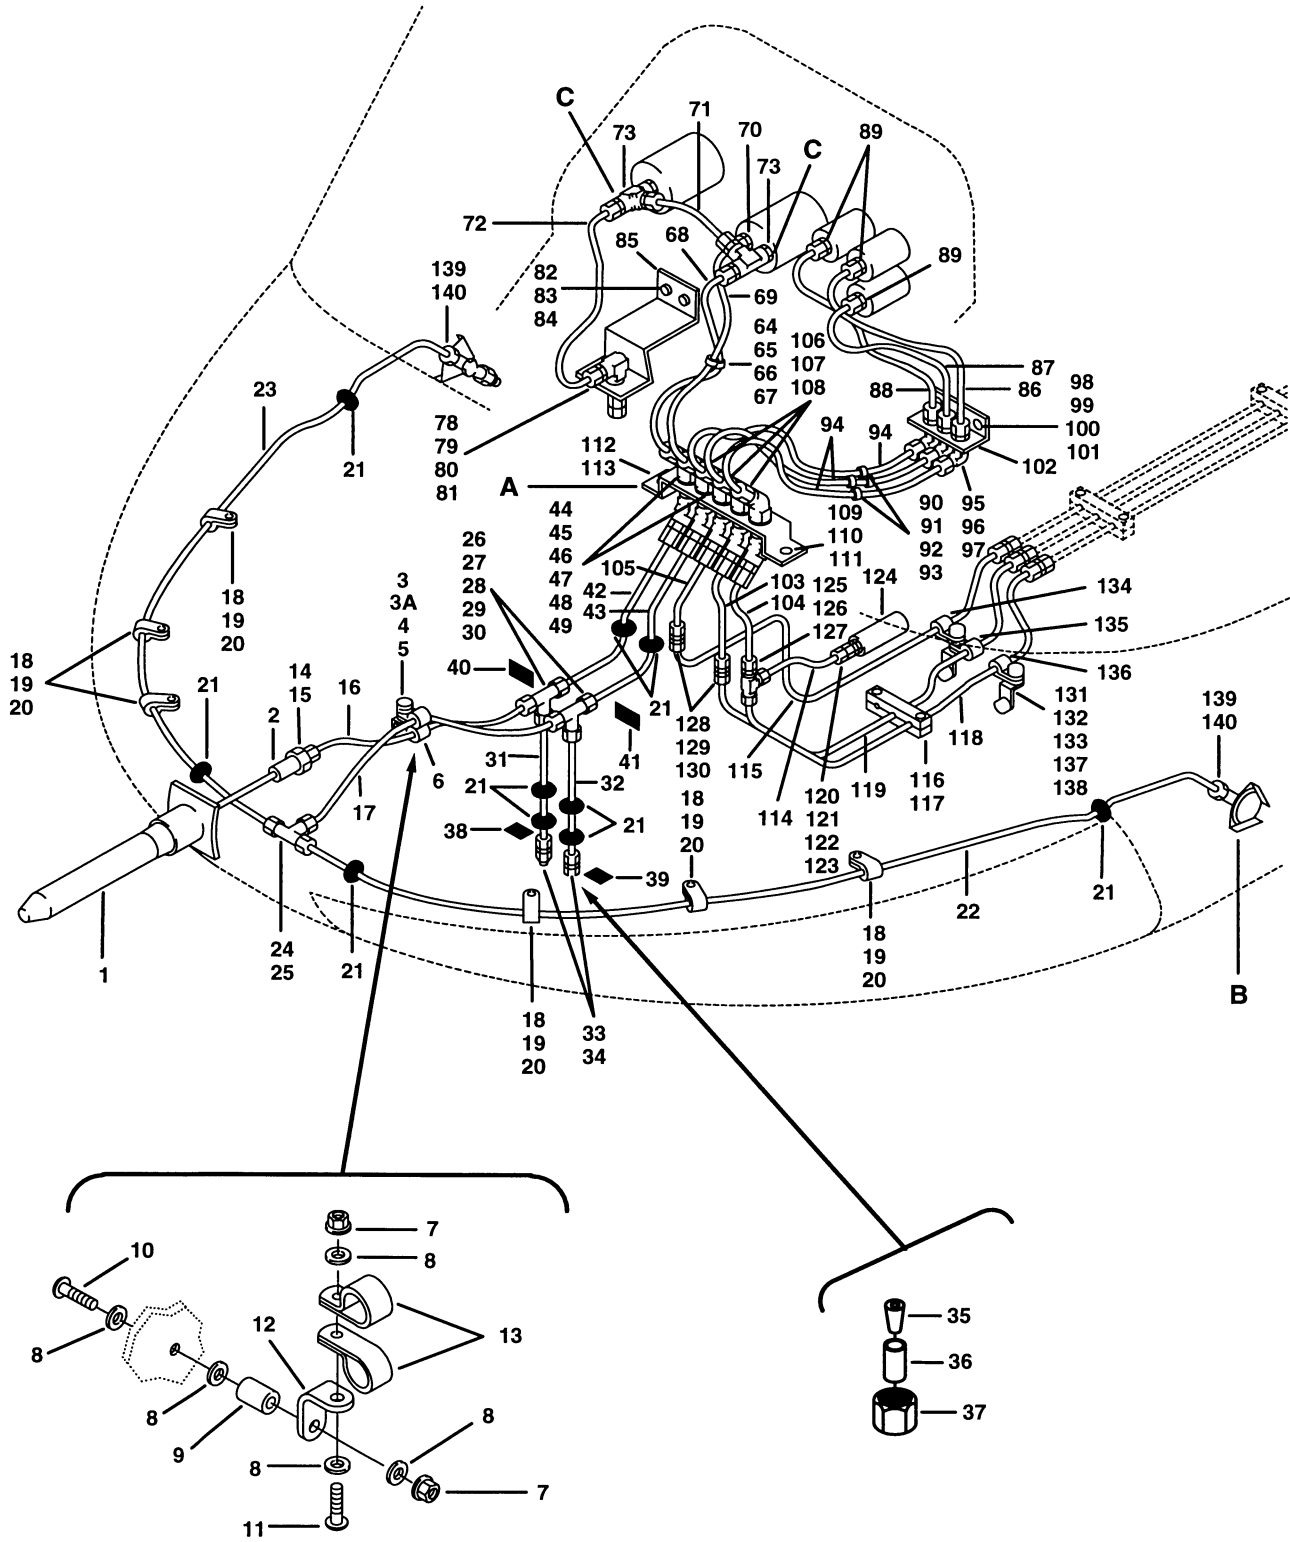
Piping installation, instrument (S/N 914 thru 1413)
